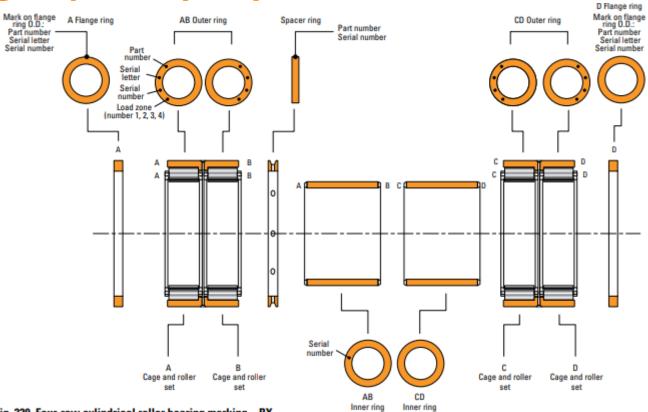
Four-row cylindrical roller bearing marking - RX.
